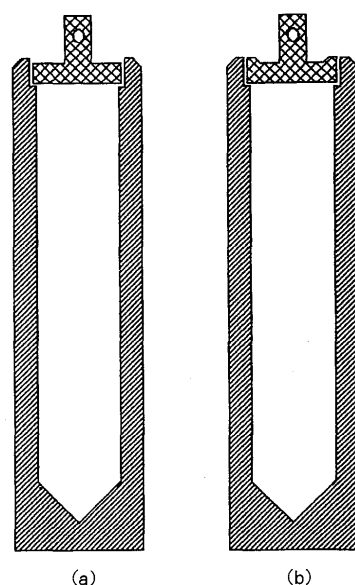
a) The structure of the welding part of crucible adapted previously.
